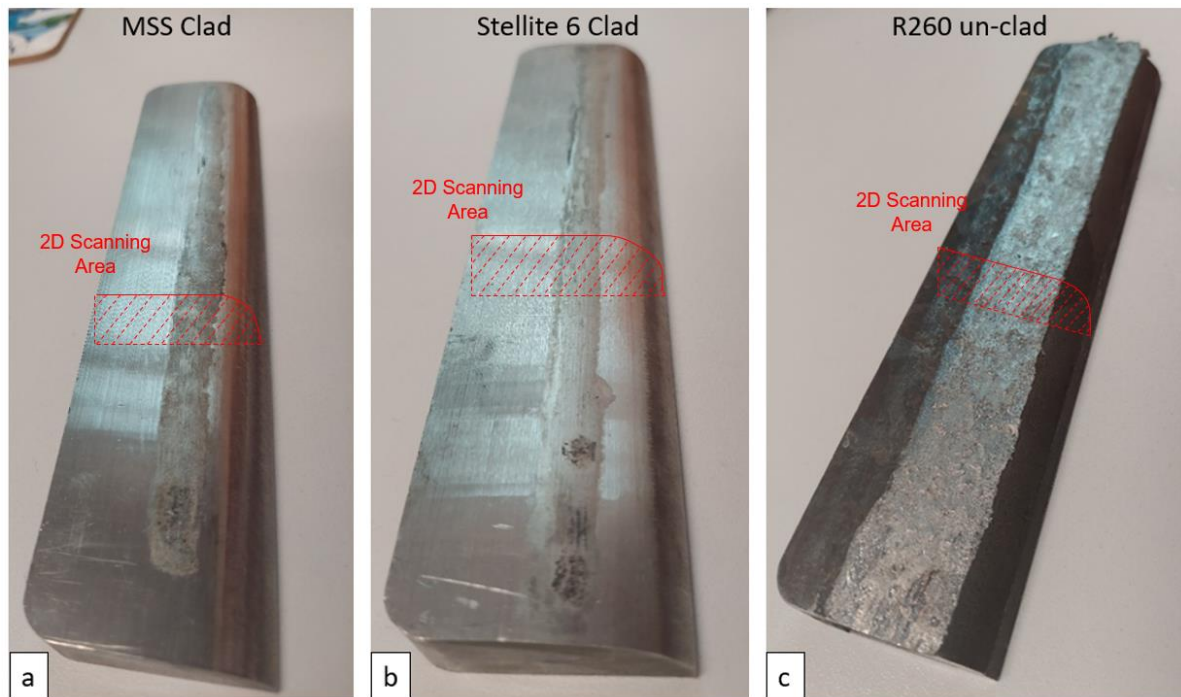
Full scale test pockets after tests: a) MSS Clad pocket specimen; b) Stellite 6 pocket specimen; c) un-clad R260 pocket specimen
